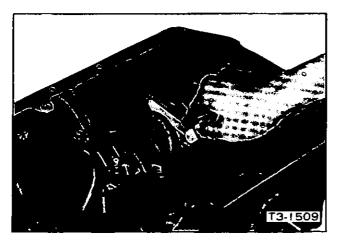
Measuring Thrust Clearance of Connecting Rod
